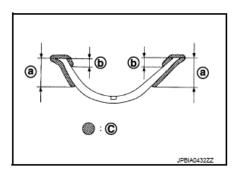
Identifying Liquid Gasket Application Positions Courtesy of NISSAN NORTH AMERICA, INC.
